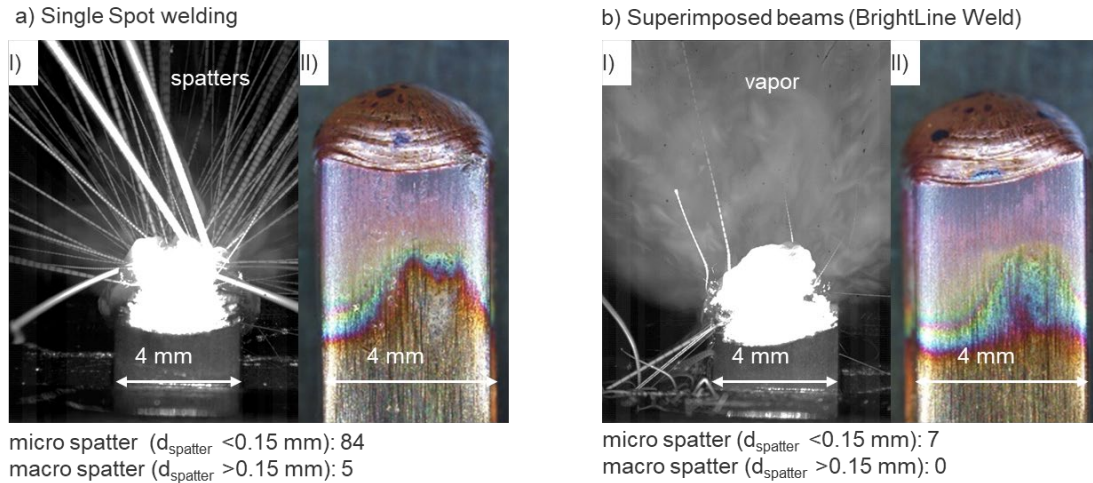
Comparison of spatters from a hairpin welding process with a single spot, laser power $P = 2 \text{ kW}$ (a) and a welding process with two superimposed laser beams, laser power $P = 4 \text{ kW}$ (b). Beside both pictures of the process (I), the welding results are shown (II). All other parameters see Table 1.
